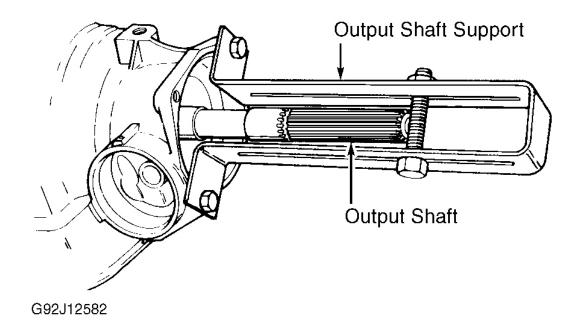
Installing Output Shaft Support Courtesy of GENERAL MOTORS CORP.
